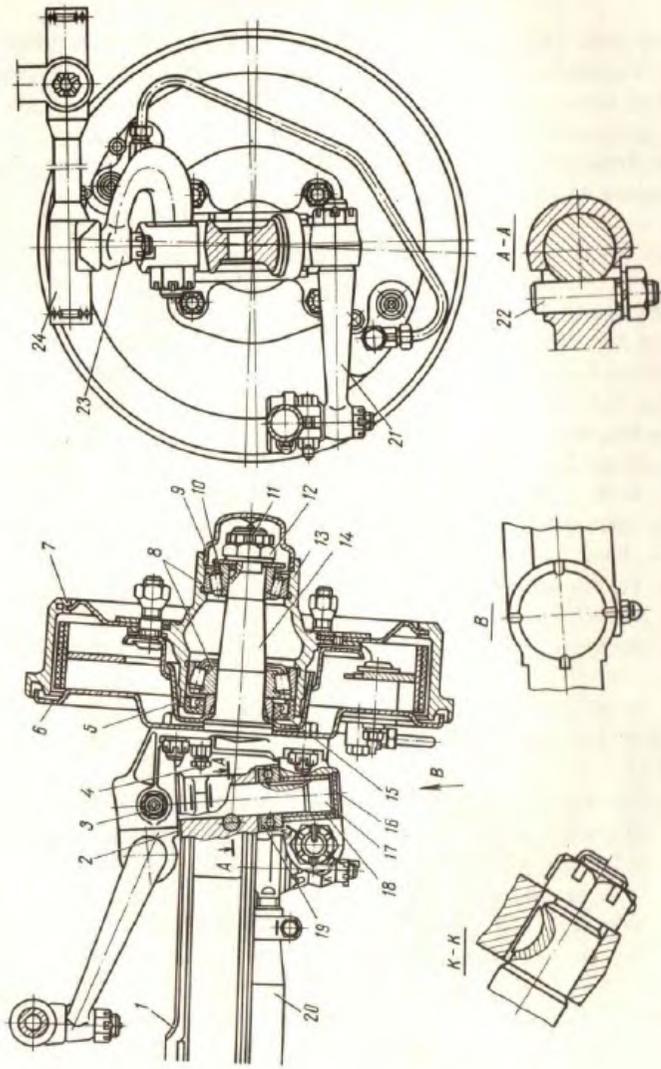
Front Axle (JAZ-45IM, JAZ-45LIM):
